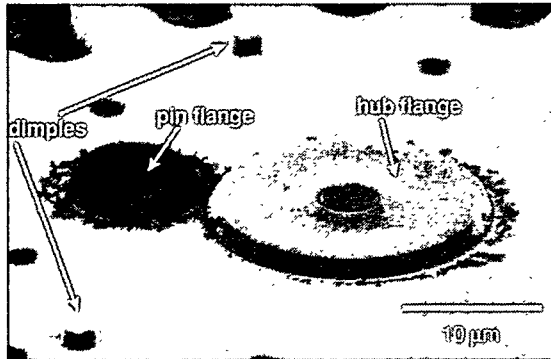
SEM image at 1kV showing wear debris on bottom of drive gear
